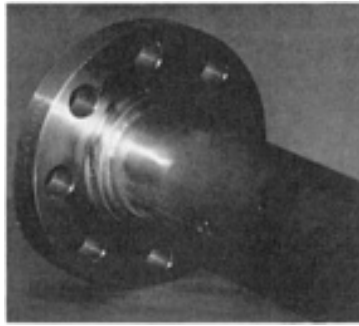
MA 956 PIPE GAS-TUNGSTEN ARC WELDED TO A 304 STAINLESS STEEL FLANGE. 308 STAINLESS STEEL FILLER METAL WAS USED.
